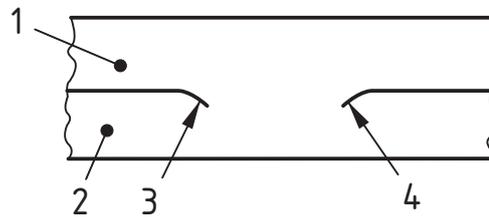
Cross-section of friction stir lap weld showing undesirable/extreme plate thinning on the retreating side and a hook feature on the advancing side of the weld
